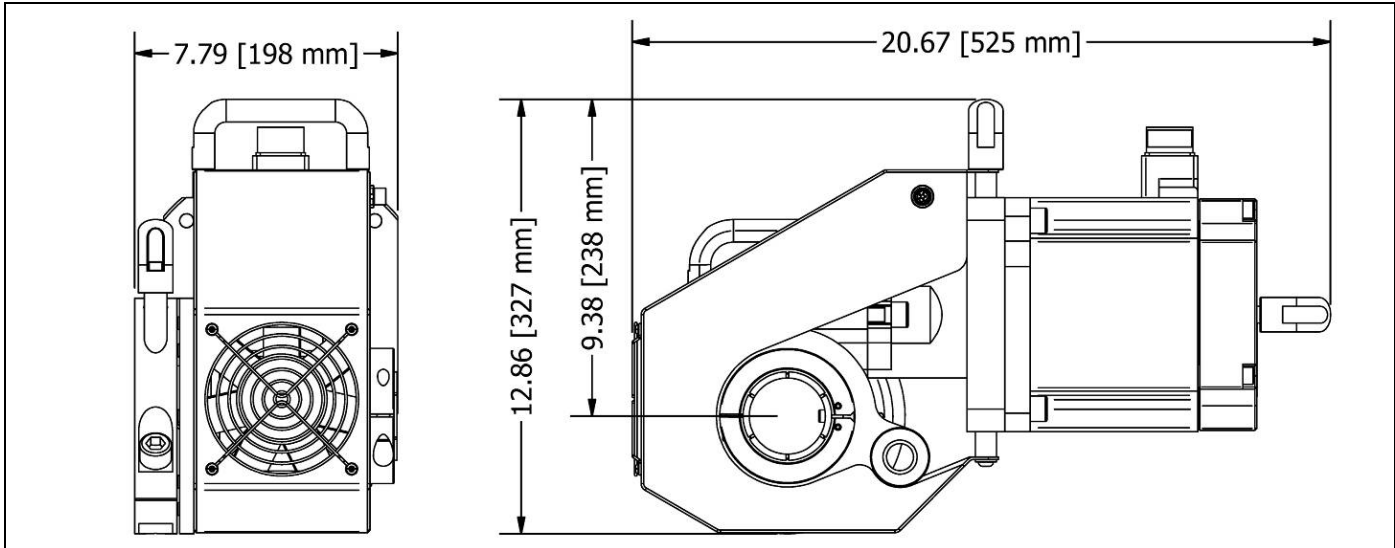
BB5000 SERVO DRIVE DIMENSIONS
